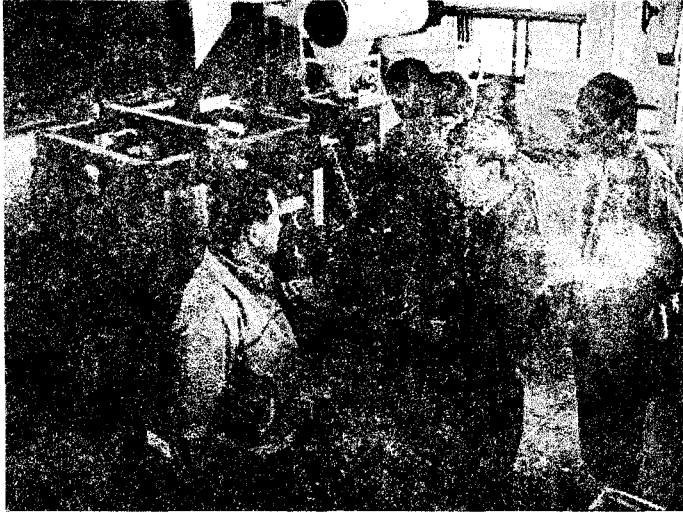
Photograph of test operation for the technical agreement with machine manufacturer
